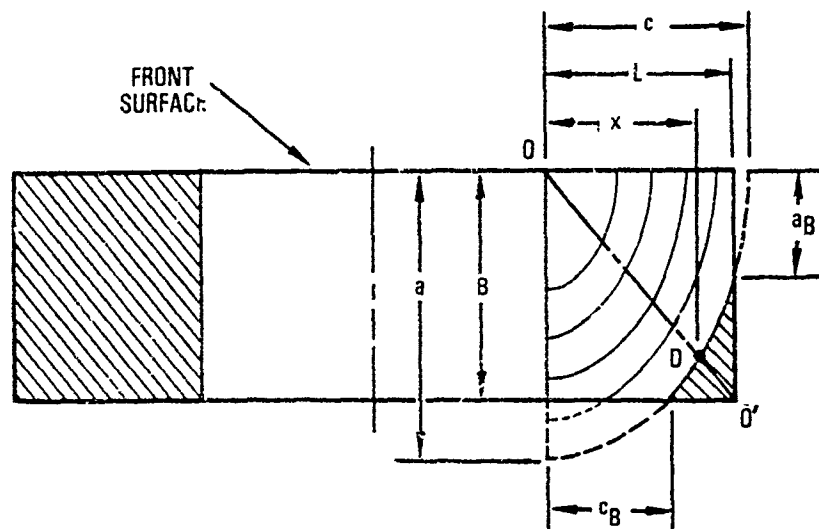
Sketch of the Extended Quarter Elliptic Corner Crack, Intersecting the Back and Outer Surfaces of the Lug
